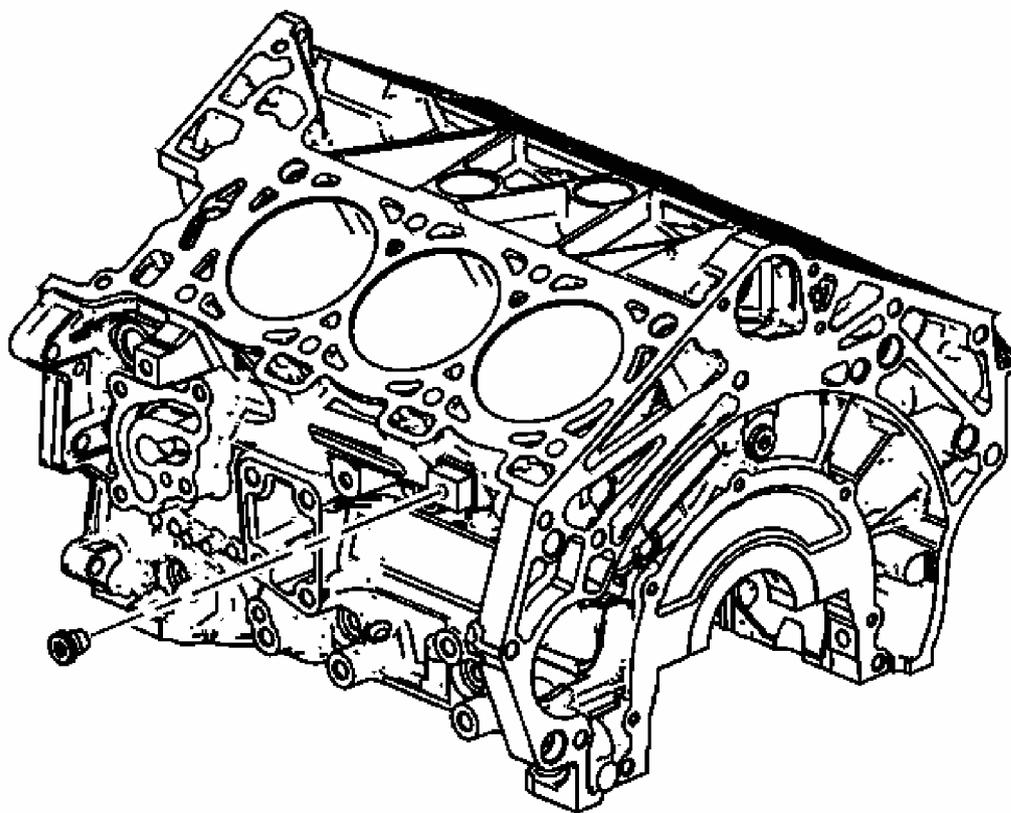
View Of M14 Left Side Coolant Drain Threaded Plug
